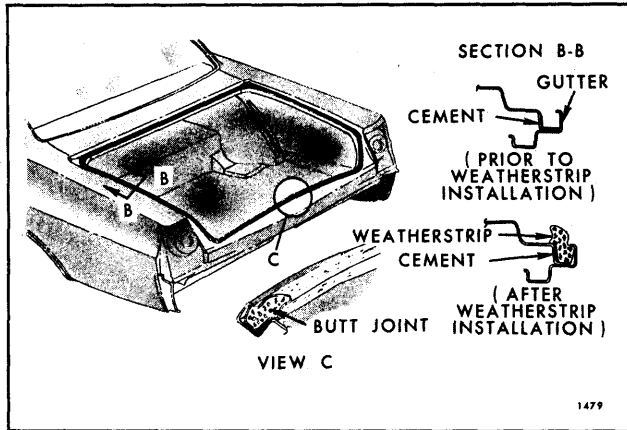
Rear Compartment Weatherstrip Assembly
